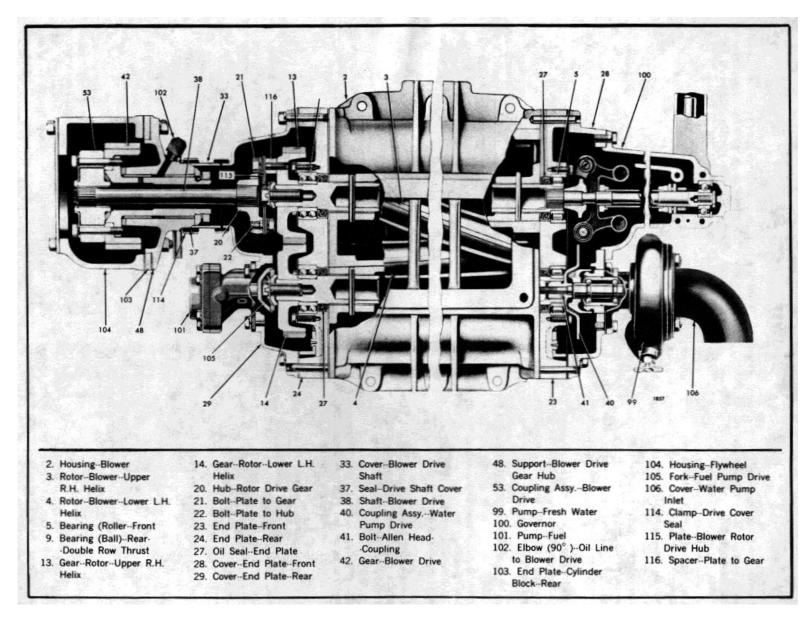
Blower and Drive Assembly and Accessories including Mechanical Governor Attached to blower
